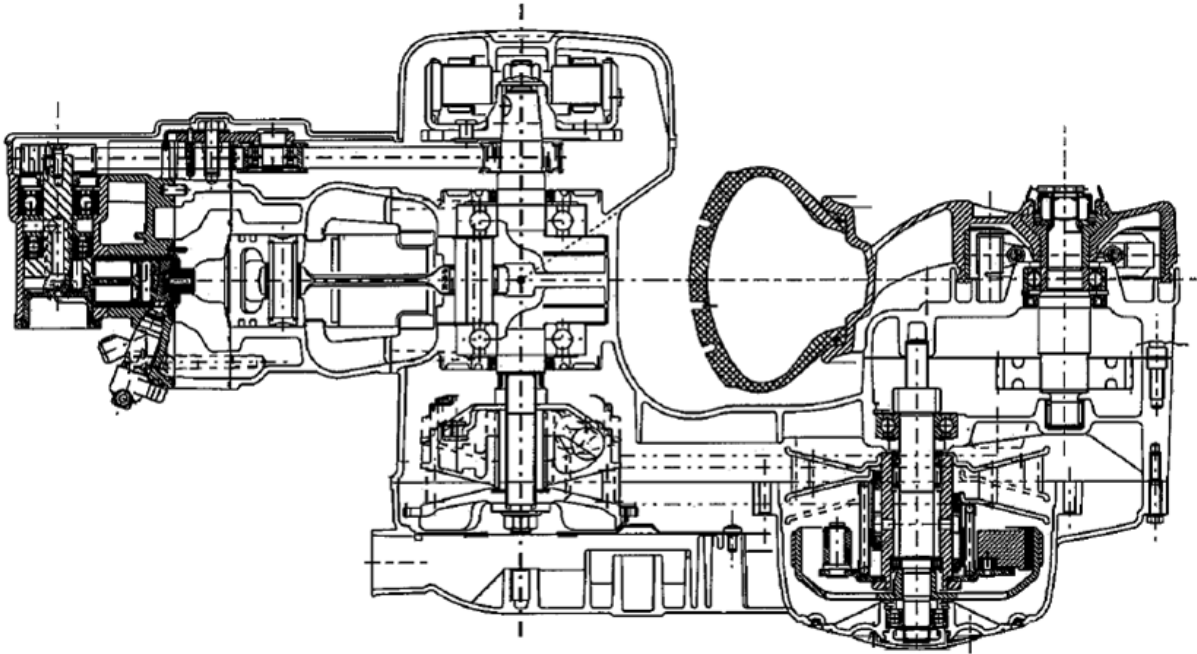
DOLCE engine layout with CVT, centrifugal clutch and three-axis gearbox [173, p. 5]
